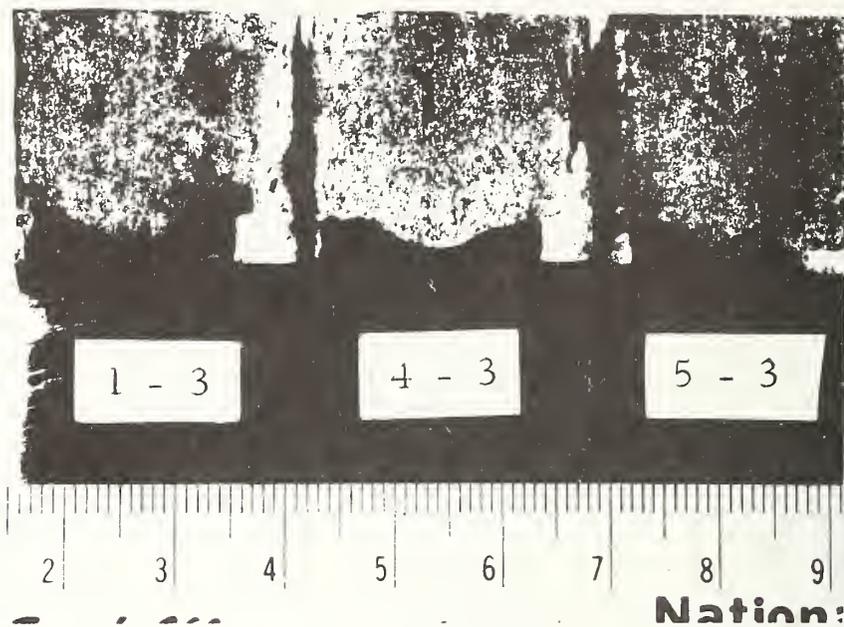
Fracture surfaces of the HAZ specimens that exhibited pop-in at 111 K.
